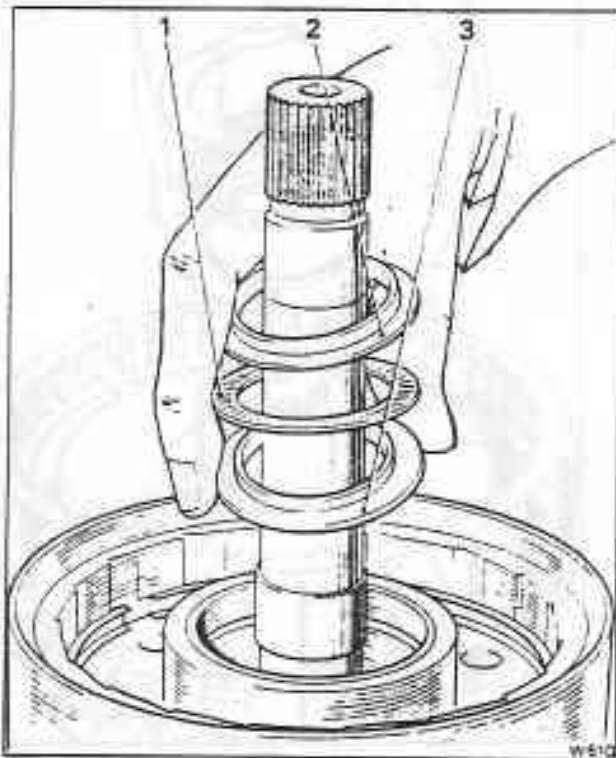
Fitting the races and thrust bearing to the sun gear
